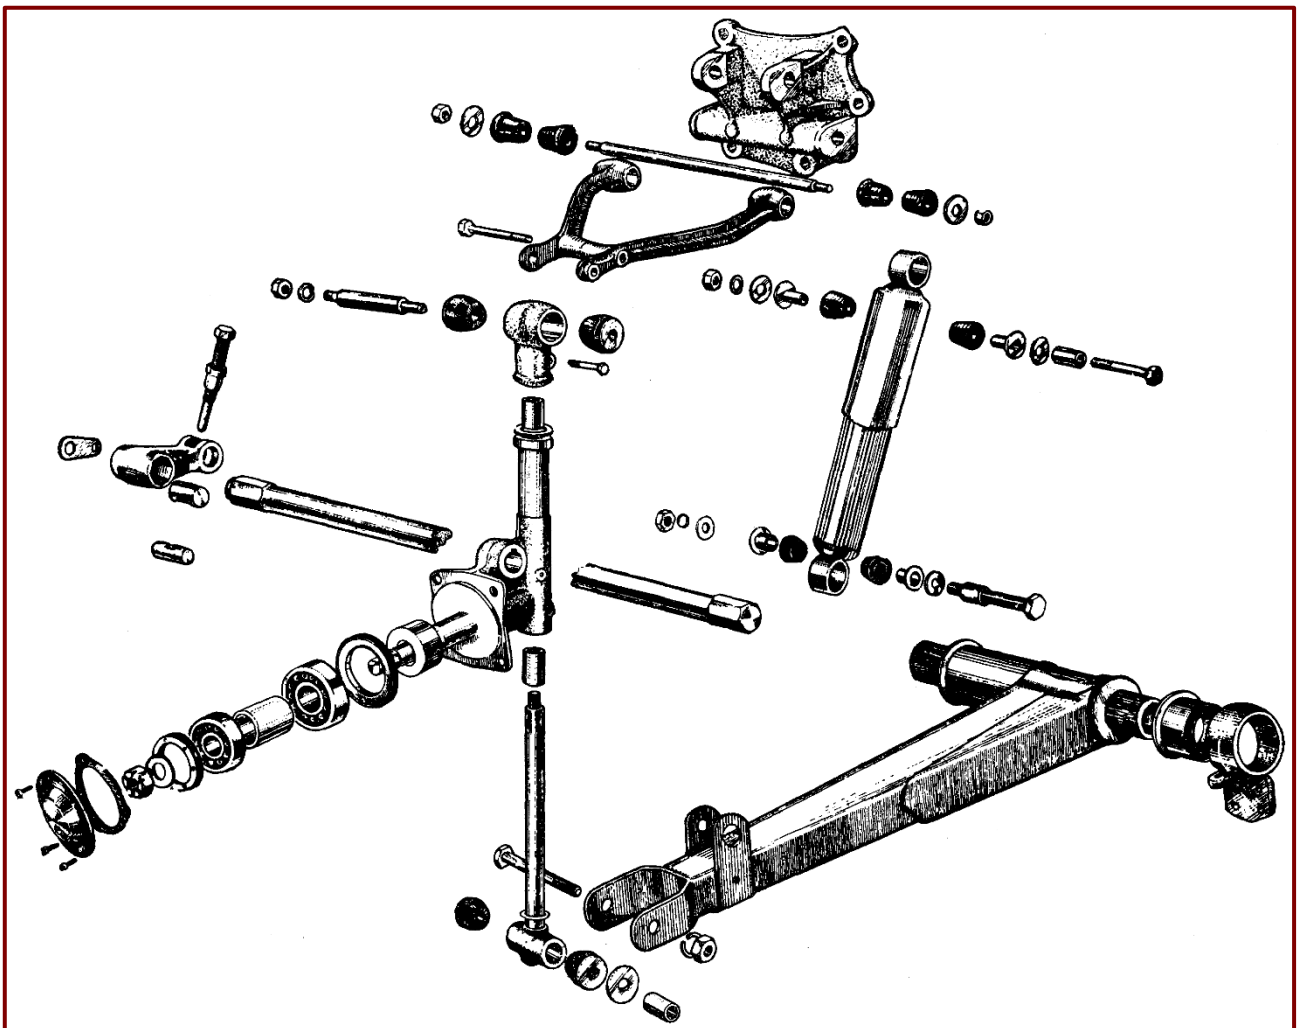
Front Suspension Exploded – After Engine No. E2/PD/21868
